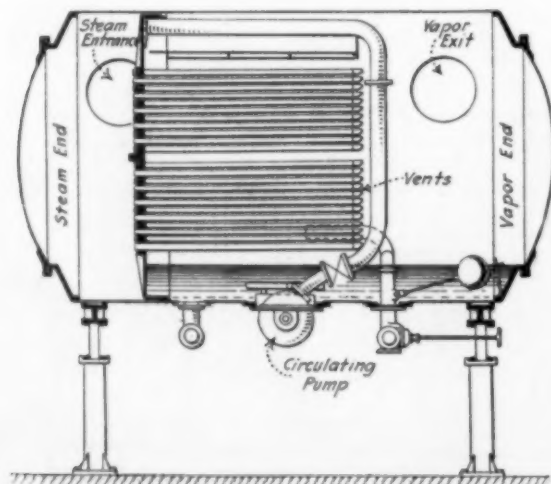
ONE BODY OF TYPE C EVAPORATOR
